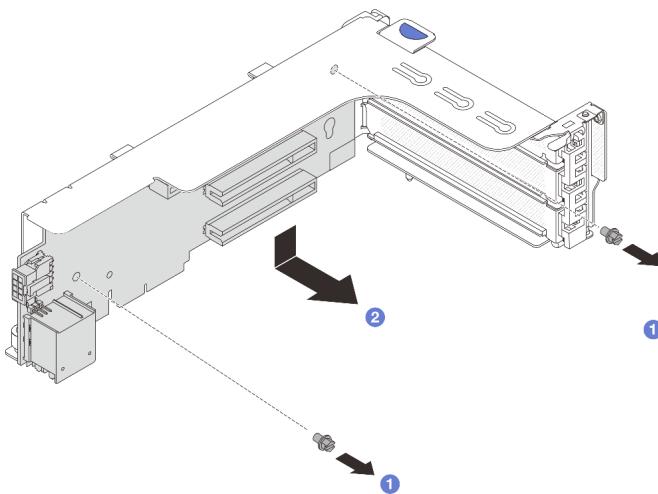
Removing the riser card from riser 1 cage or riser 2 cage
